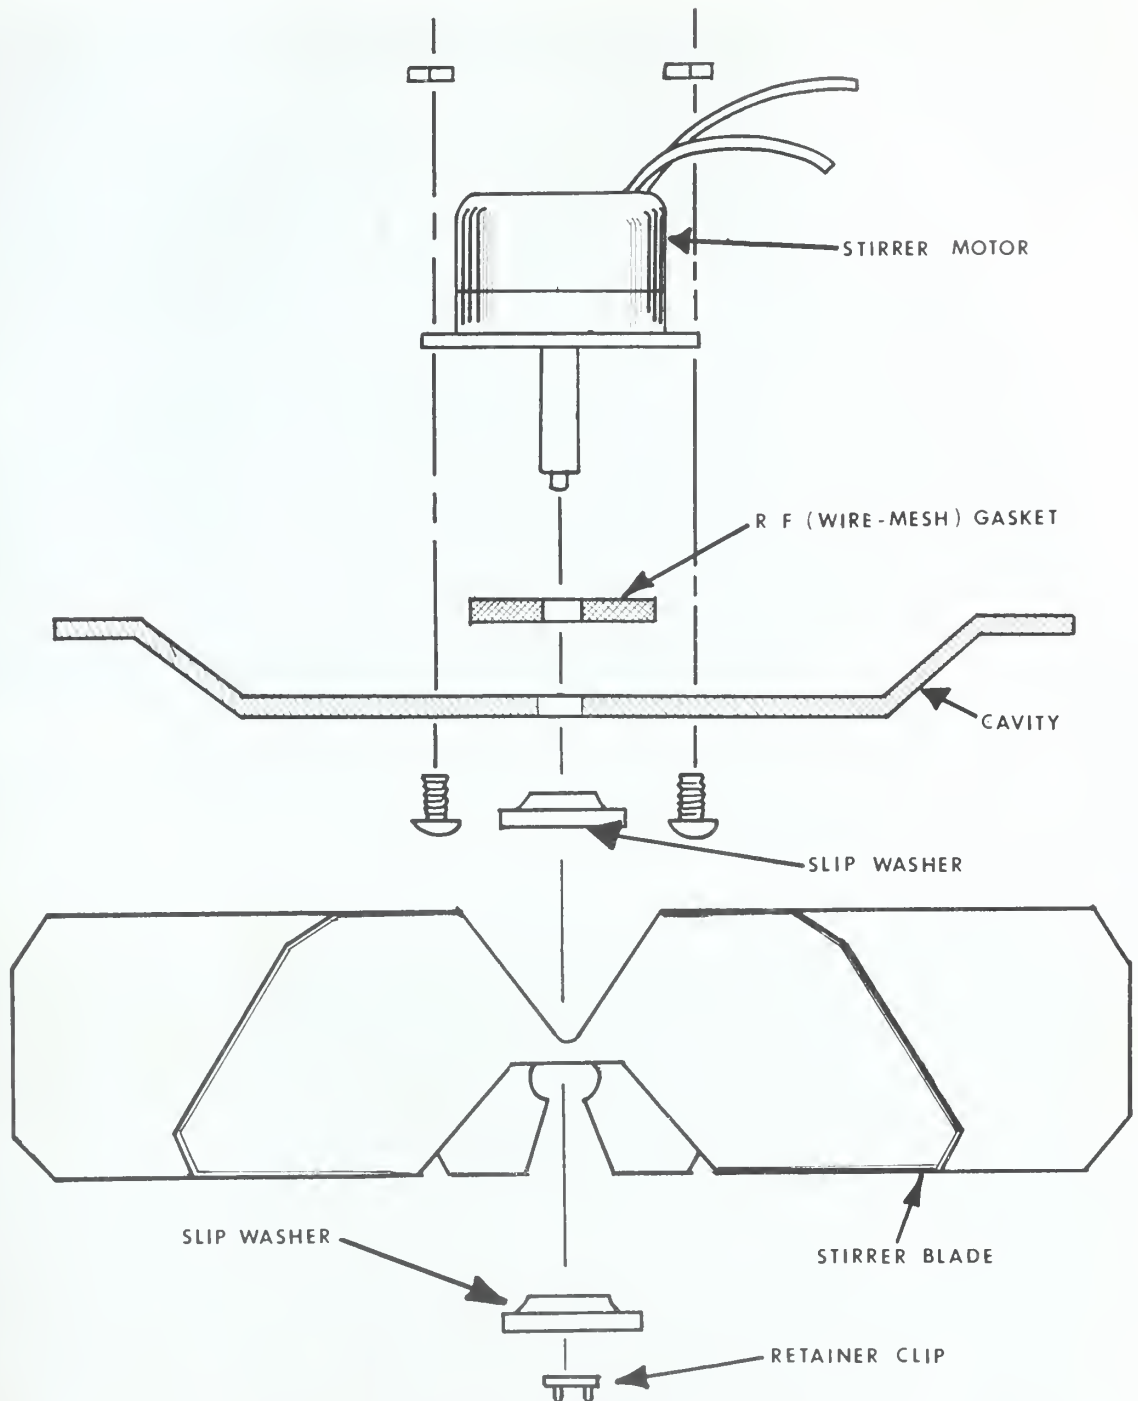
Typical stirrer assembly. (Courtesy of Michael S. Wagner)
